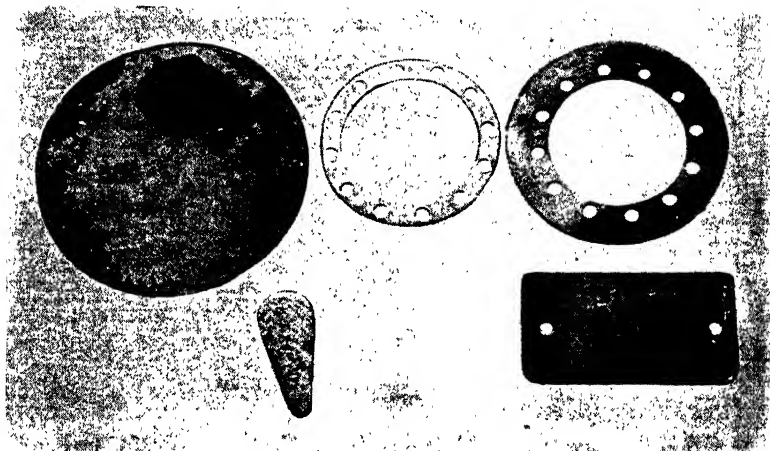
These are examples of parts punched out of plates by the punch press shown in Fig. 55. Often such parts may be taken from scrap. (Courtesy of R. G. LeTourneau, Inc.)
